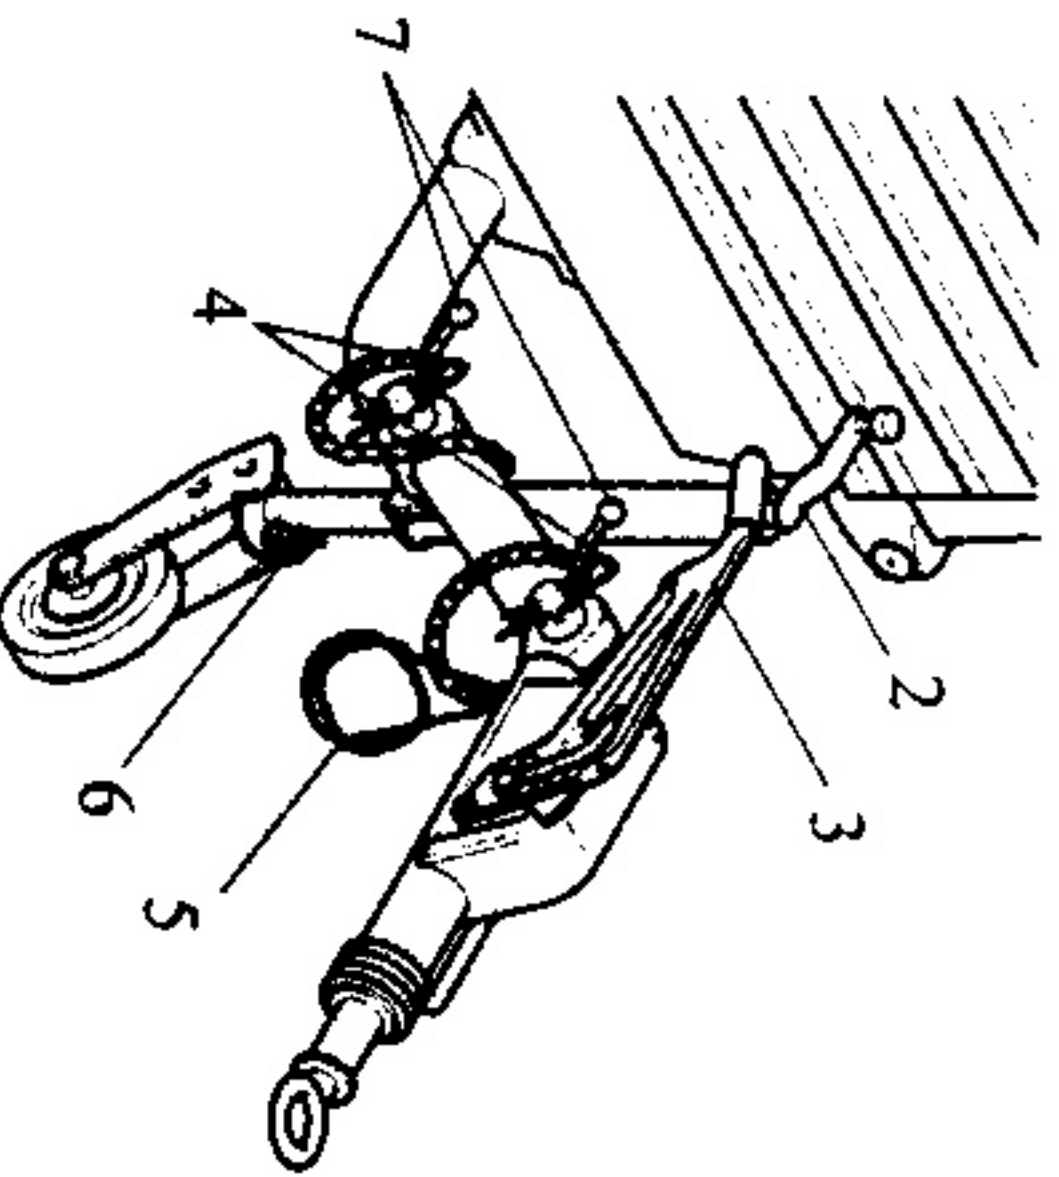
Adjustable towbar with jockey wheel and brakes
